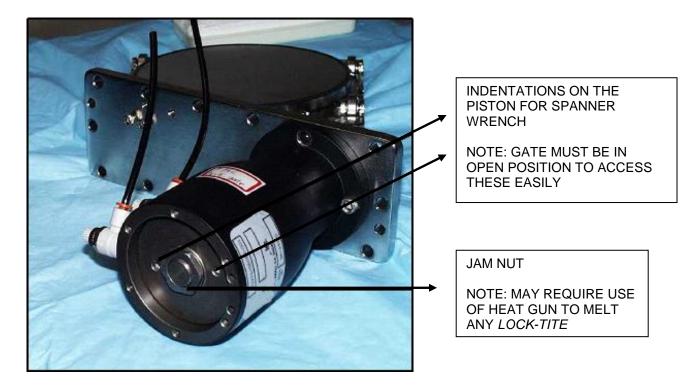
PISTON CLOSE-UP FOR SPANNER WRENCH POSITIONING
